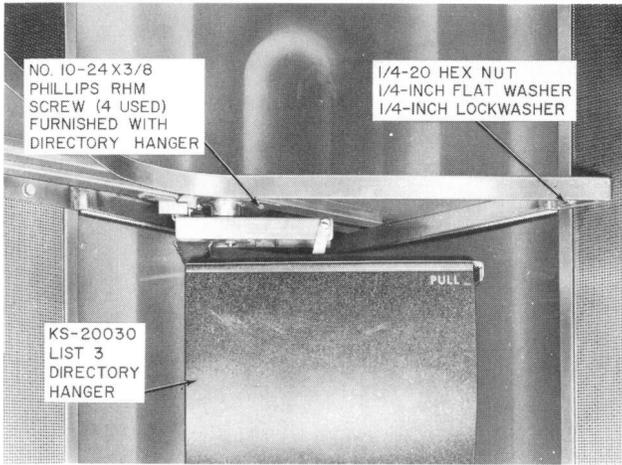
B-699052 Shelf Assembly with KS-20030, List 3 Directory Hanger
